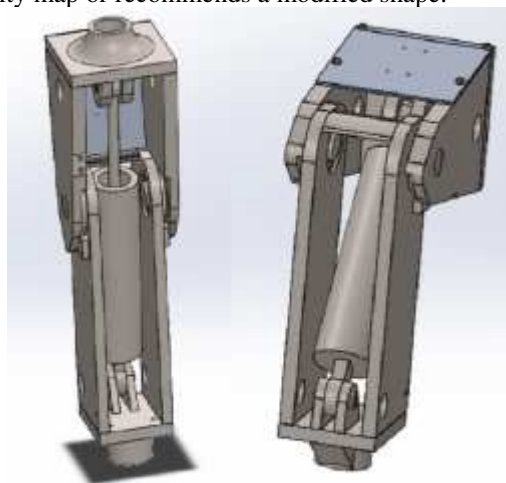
The assembled mechanical part of the optimized knee mechanism
